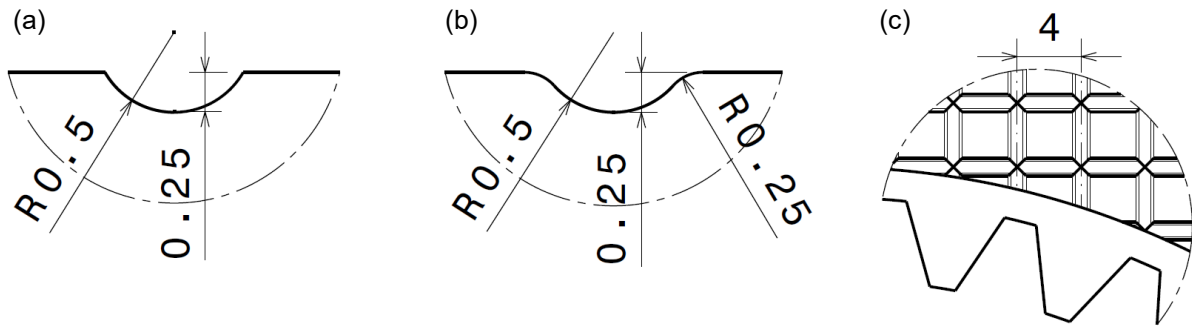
Data of grooves in friction lining D123: nominal groove cross-section from production drawing (a), adopted groove cross-section from measurement of series parts (b) and groove pattern (c) from [Sch22a]
